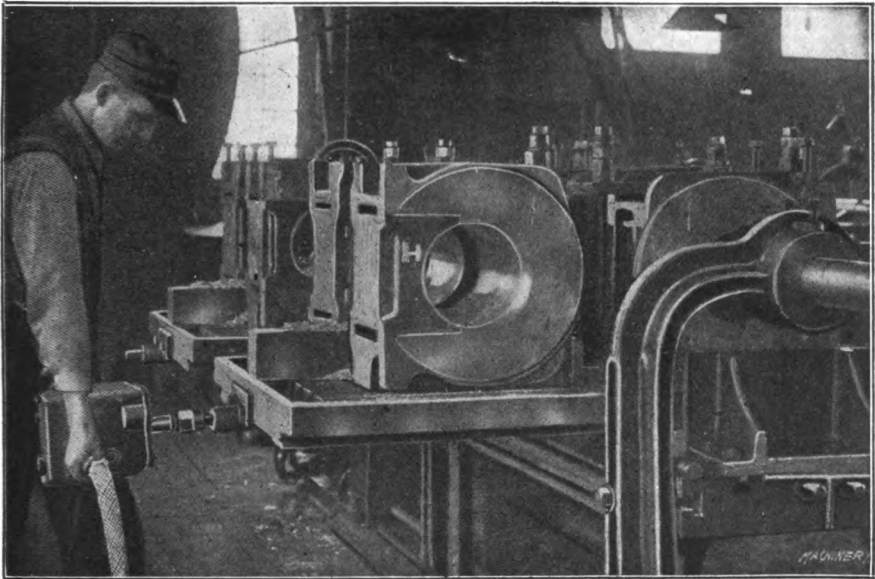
The Last Operation. Finishing the Bearings on the Boring Machine. Note use of Air Drill for Traversing Double Table
